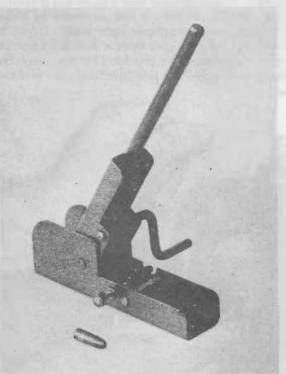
Tools like the SAS unit illustrated cannelure all bullets, jacketed and lead. This unit also crimps handgun case necks after bullet seating.
